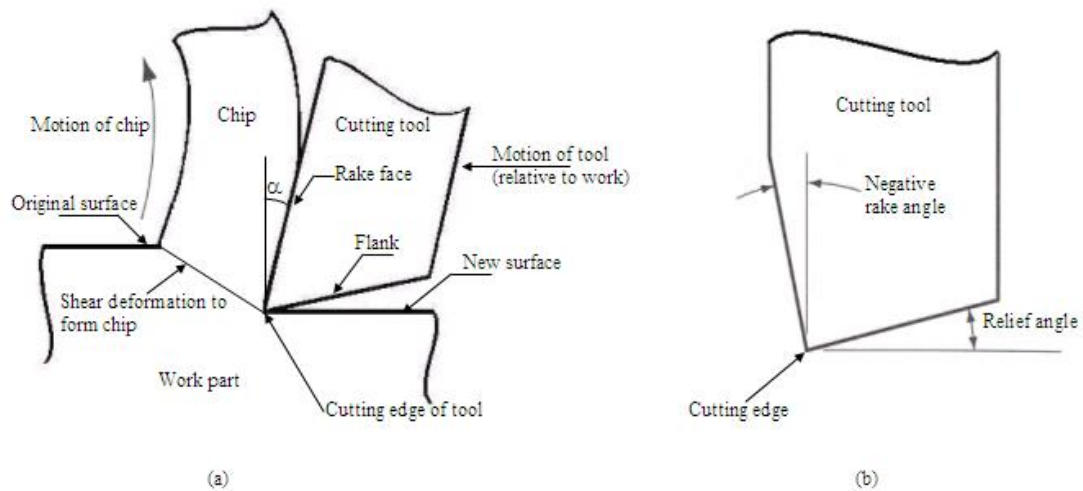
a) A cross – section view of the machining process., b) Tool with negative rake angle compare with positive rake angle in (a).
